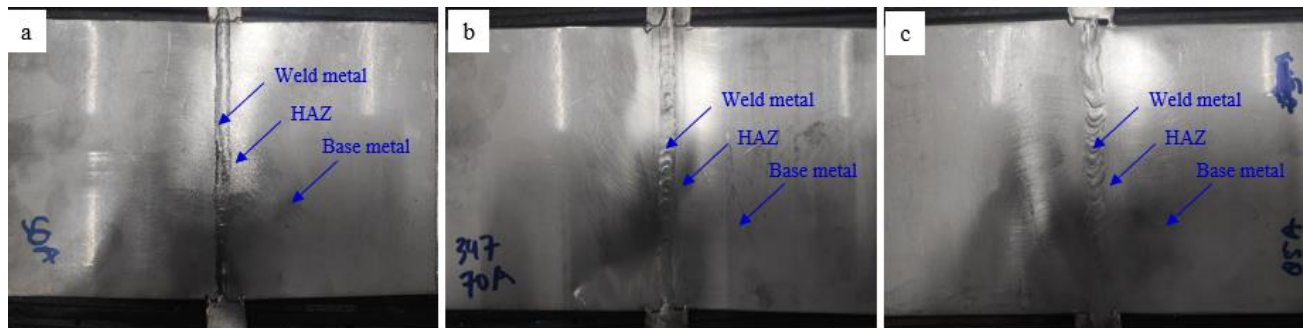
Welded specimens: a) high heat input (HI), b) medium heat input (MI), and c) low heat input (LI).
